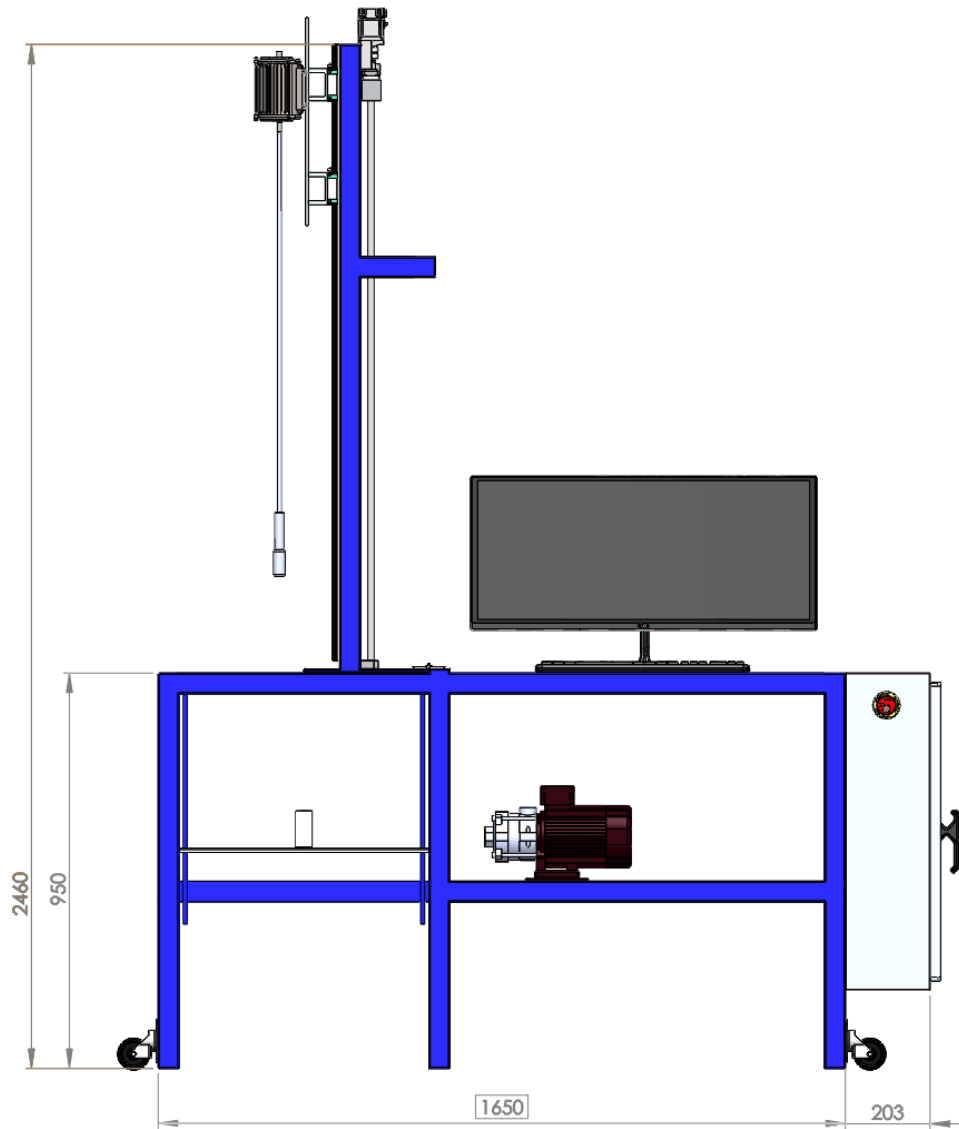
Side view of the rig in upright position (dimensions in mm)
